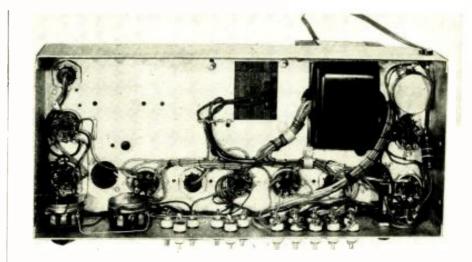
Underchassis view of power supply. Layout, as shown, should be followed closely.
